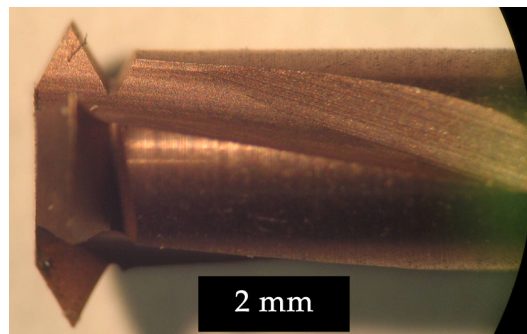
Photograph of the solid carbide single point micro partial profile 60 thread mill.
